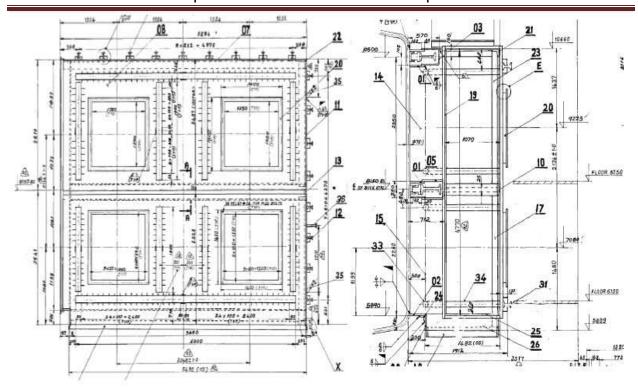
FRONT AND SIDE ELEVATION VIEW of BURNER WINDBOX
